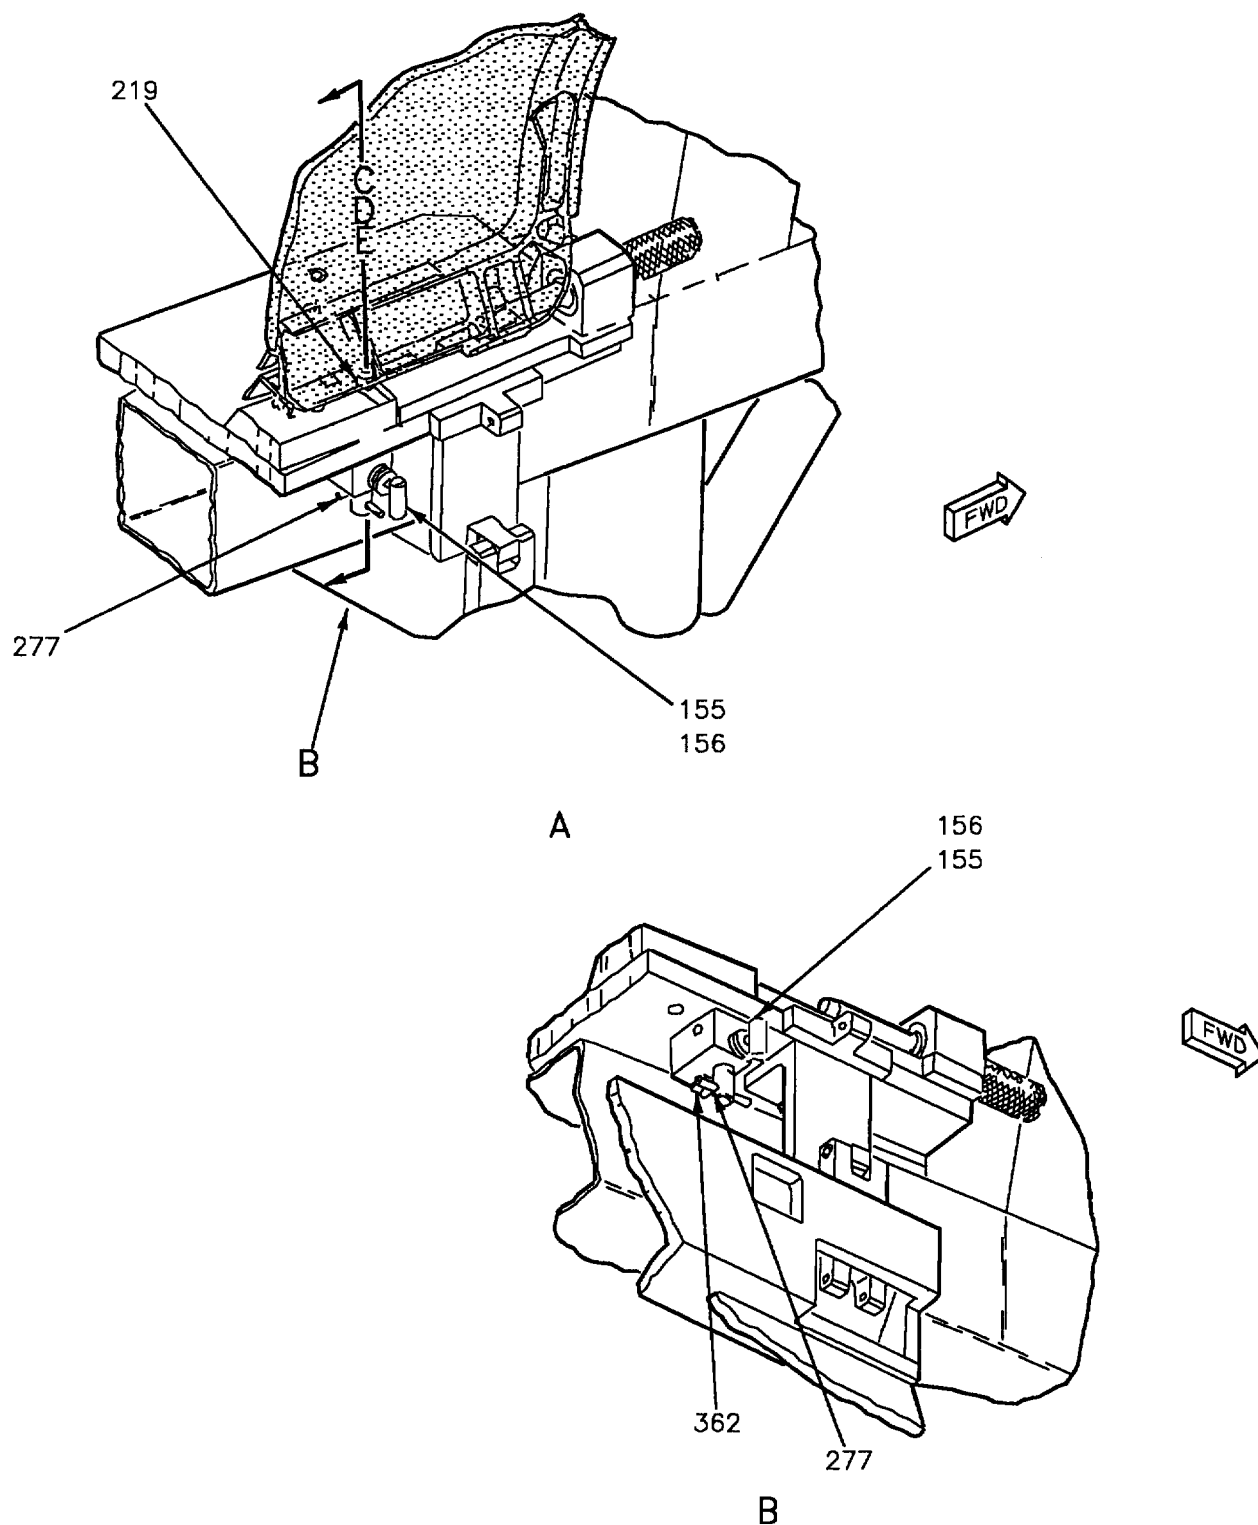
Inspection or Replacement - Side Seal Retainer (Sheet 2)
